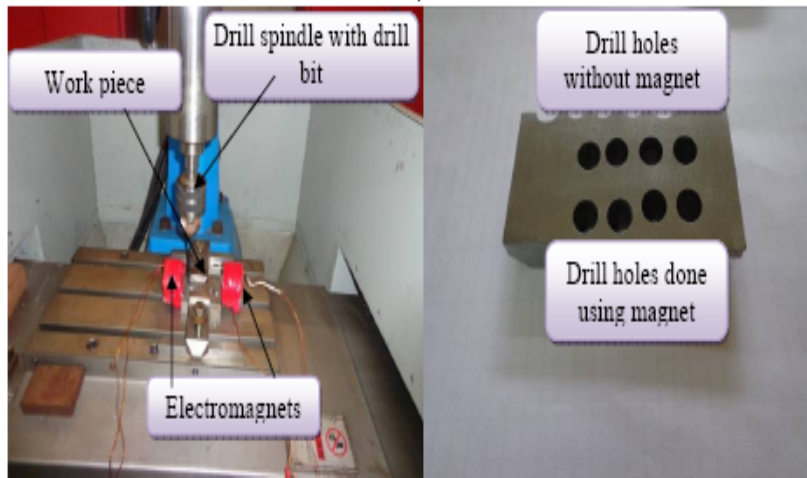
(a) Experimental setup, (b) Work piece with drilled holes on it
